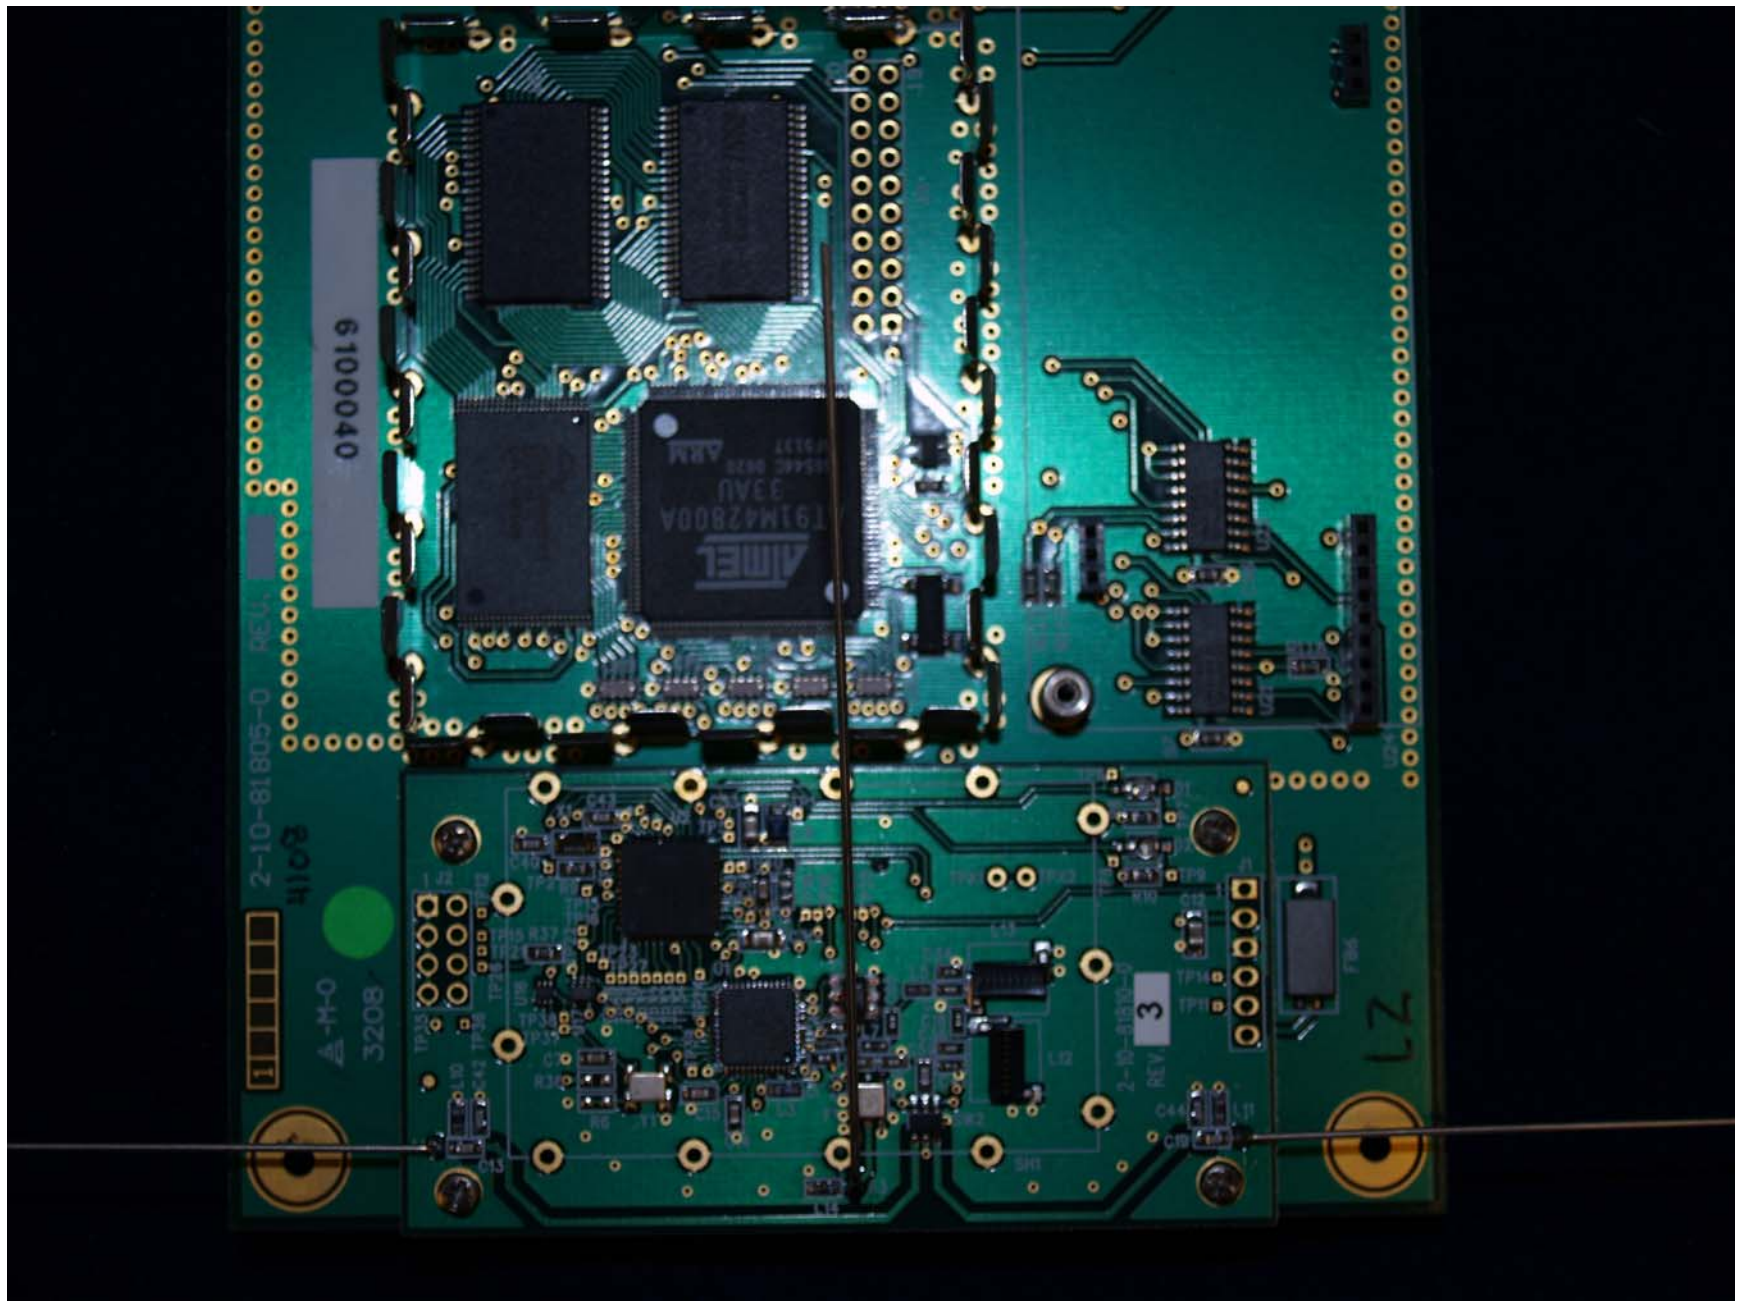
HomeBase (HB-100) – PCB (top view) close-up of front half
